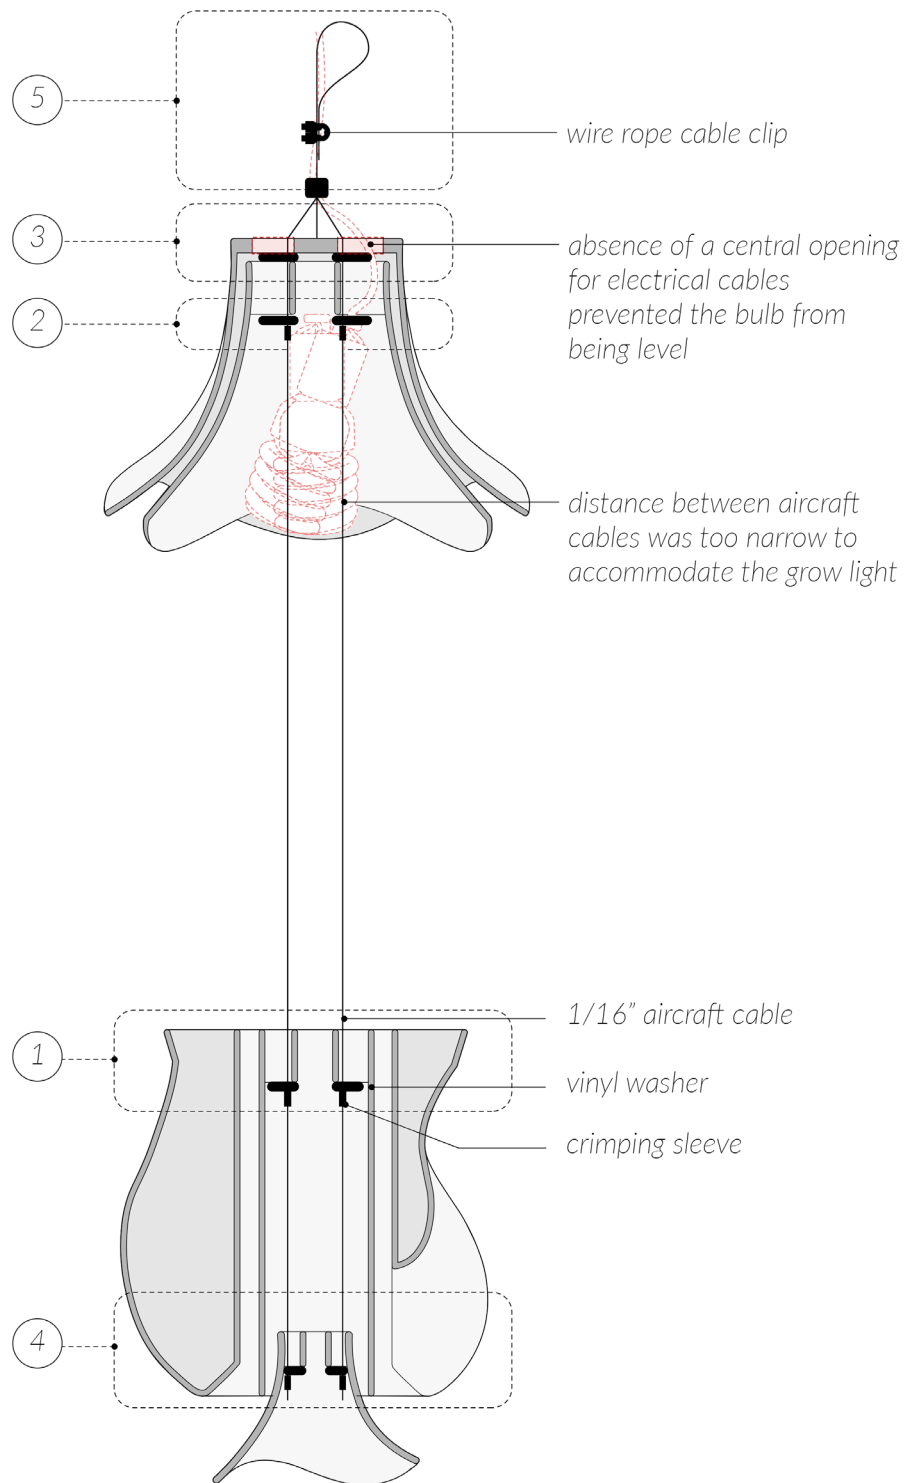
Diagram showing the structural system for the finished installation at the Canadian Clay and Glass Gallery.
